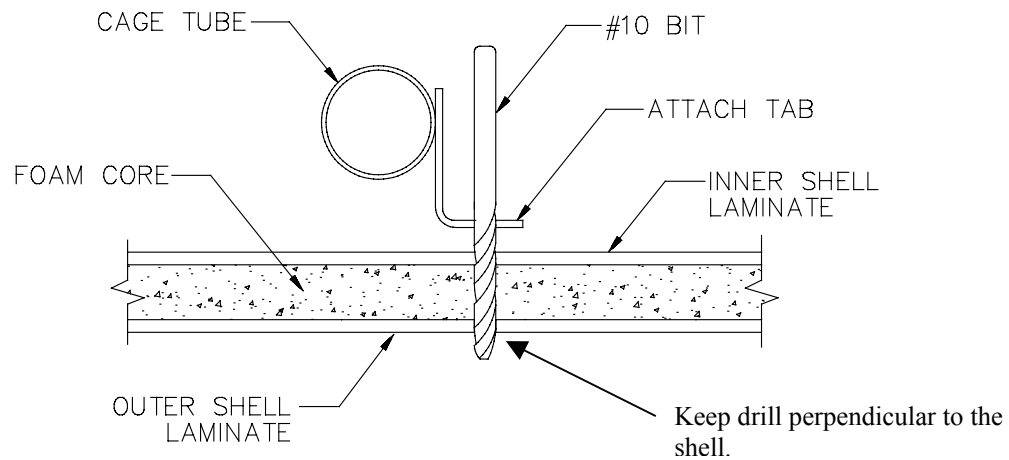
Drilling the Initial Attach Tab Hardpoint Holes
